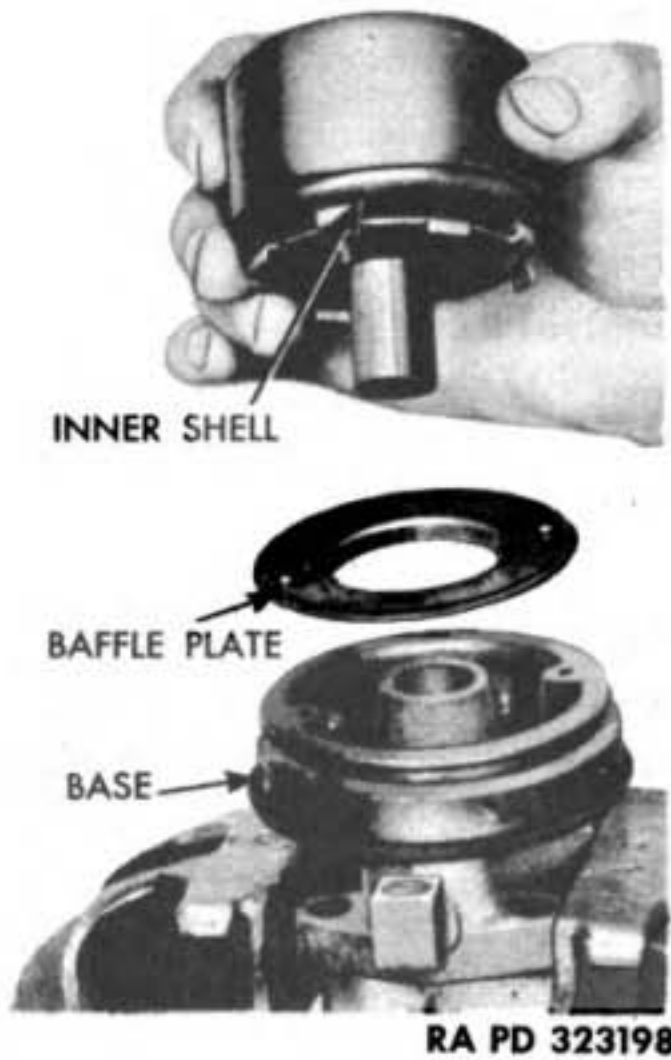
Removing Inner Shell, Baffle Plate Removed
